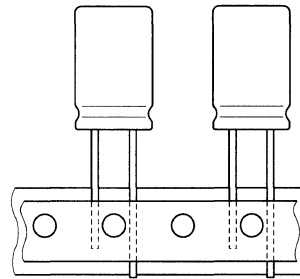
Form CB, cut leads; see Table 2 for dimensions.
